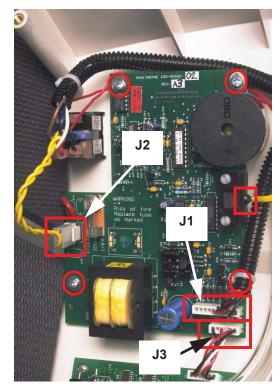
FIGURE P: CONNECTIONS AND SCREW LOCATIONS ON MAIN PCB
